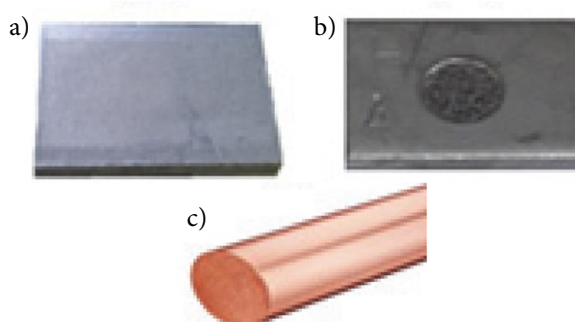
The image of (a) raw workpiece (b) EDMed workpiece (c) tool electrode.
